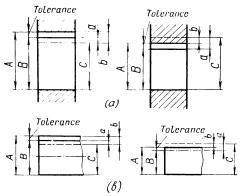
Extreme dimensions for holes (a) and shaft (b)
